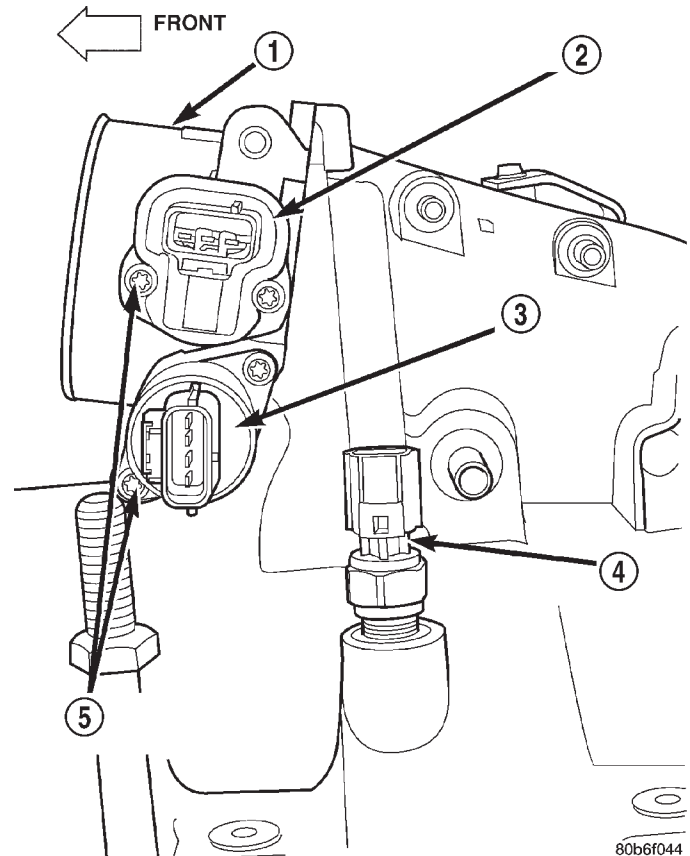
Intake Manifold Air Sensor Location—4.7L V-8 Engine
